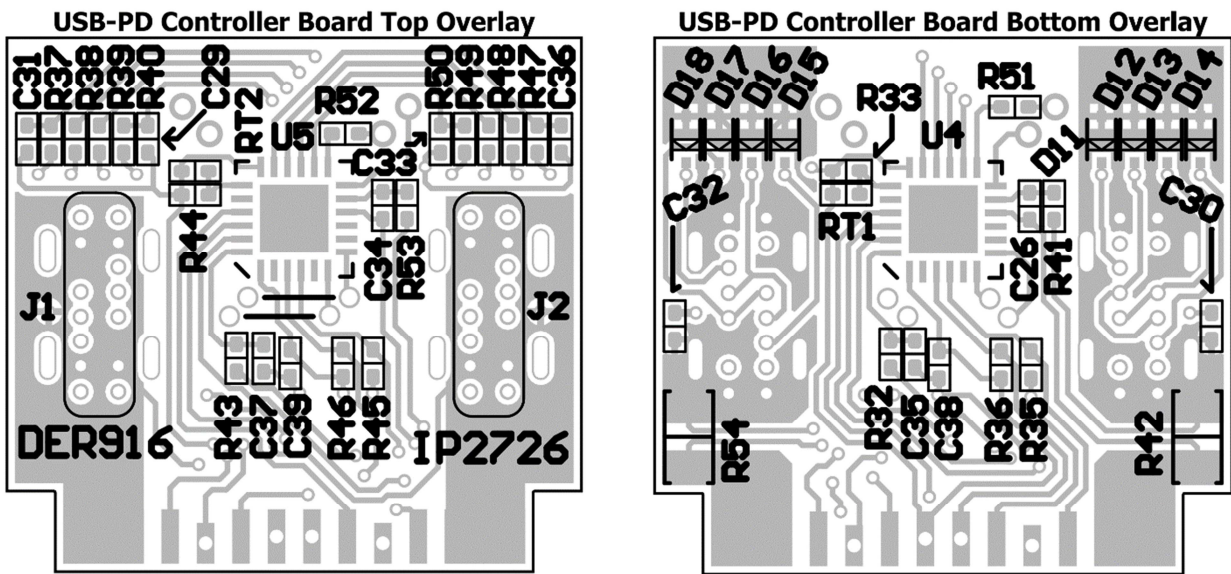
DER-916 PD Controller Board Rev C PCB Overlay Layers.
